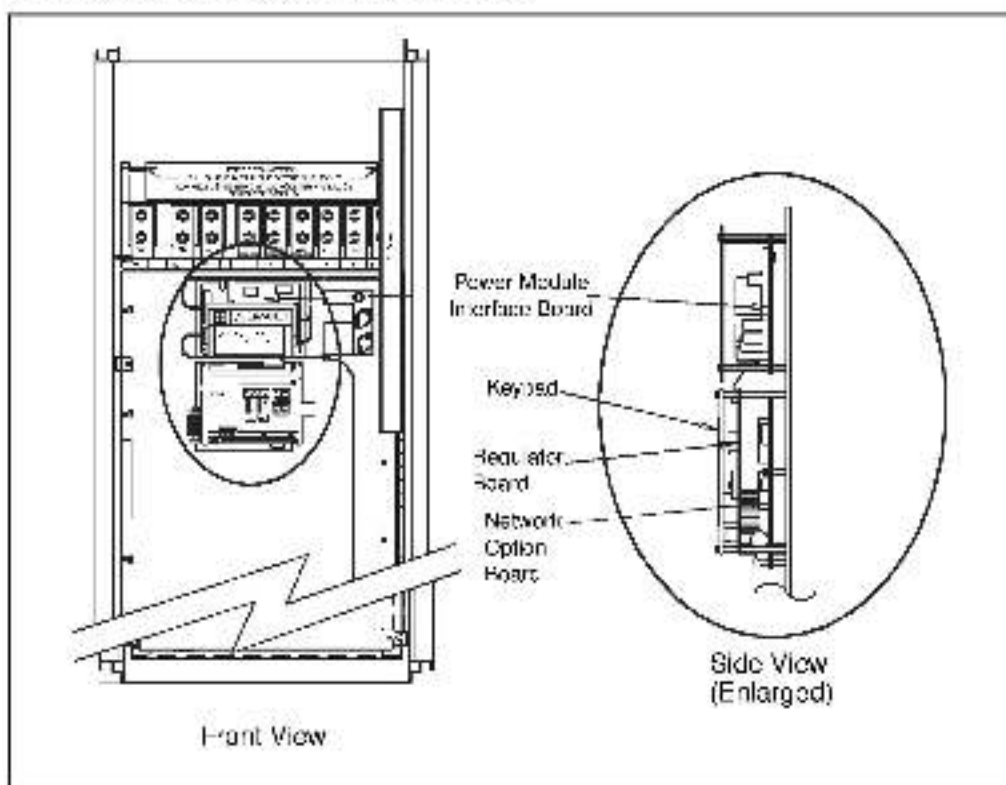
200 to 400 HP GV3000/SE Drive
